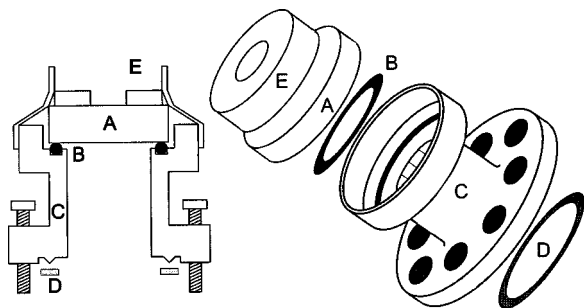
Outer vacuum window. The precision annealed 2 in. SF-57 window (a) fits into the stainless steel holder (c) and maintains a vacuum tight seal via the rubber O ring (b). This is then bolted to the outer stainless steel vacuum can, with a copper gasket (d). Stresses induced by bolting the bottom plate are not transmitted to the glass. The temperature controlled aluminum donut (e) greatly reduces long term drift and noise. Flexible PVC shrink tubing helps hold the donut in place.
